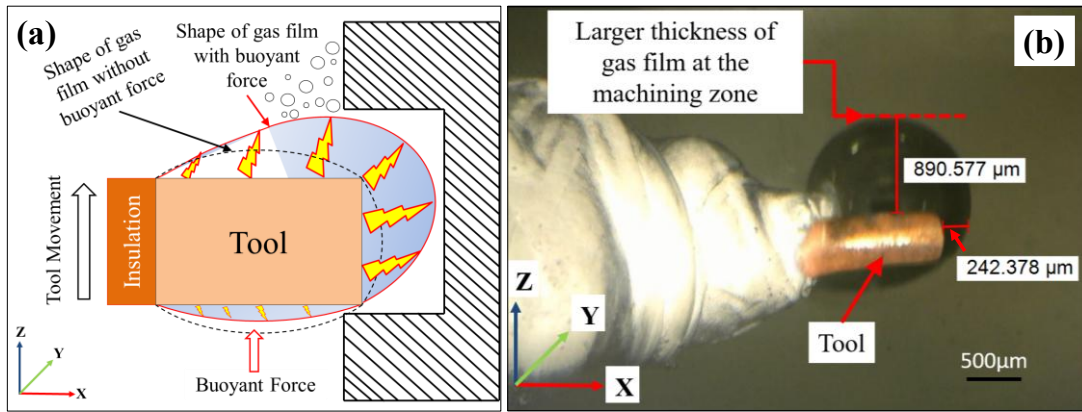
8 Shape of gas film due to surface tension and buoyant force for vertically upward tool feeding technique (a) Schematic view (b) Photographic view
